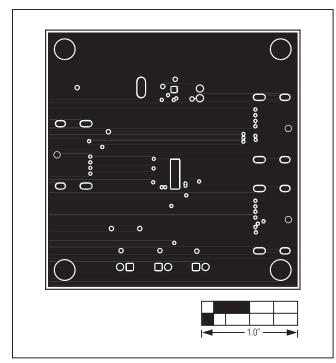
MAX14998 EV Kit PCB Layout—Inner Layer 3
